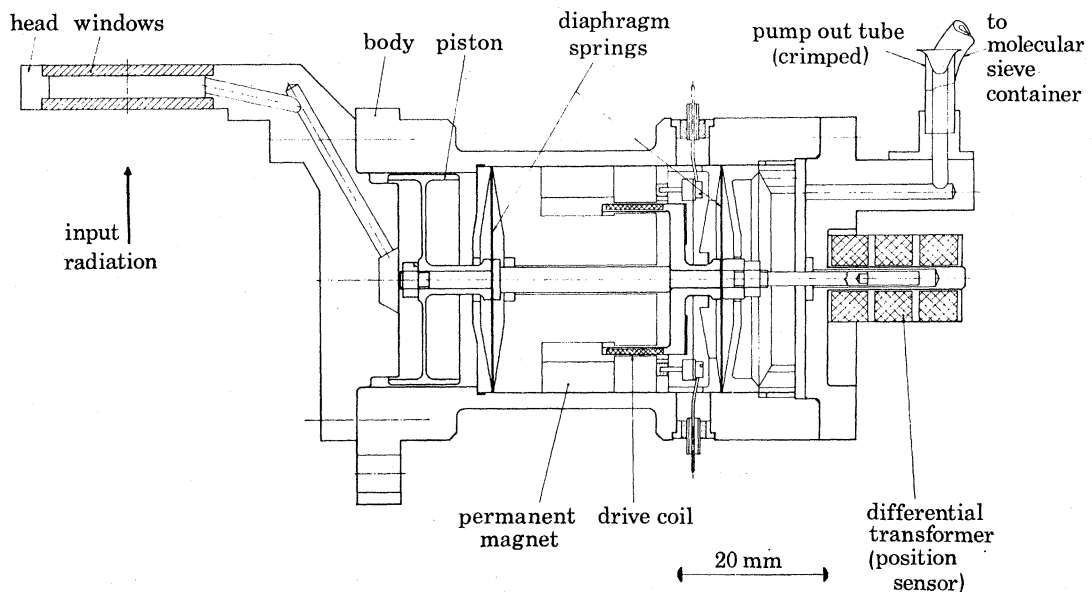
Cross section of a p.m.r. assembly. The body of the PMR is made of titanium with gold 'O' ring seals at each end. The support springs and coil lead-outs are made of beryllium-copper. The thermostatted container of molecular sieve is not shown.
